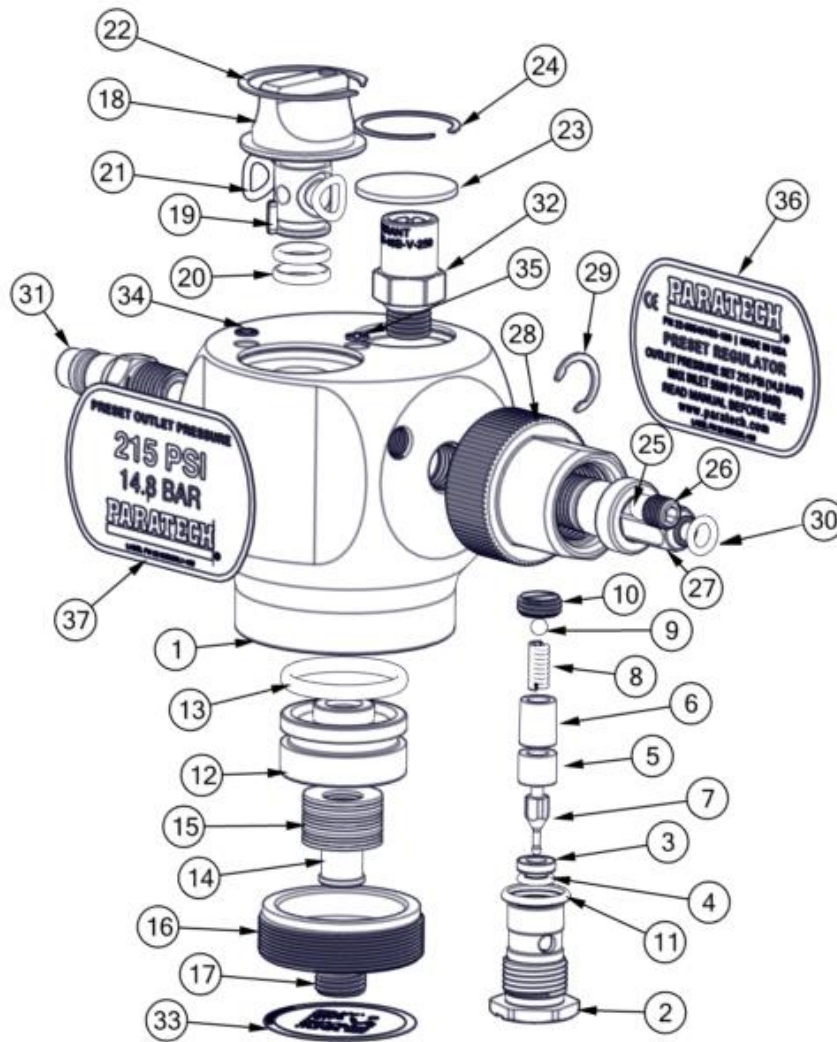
22-895401G3-180 180 Regulator, ALB G3 Preset CGA Exploded View
